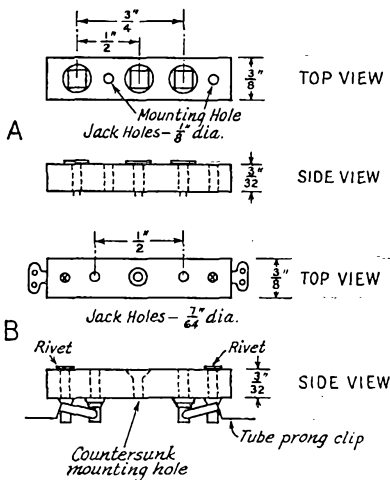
Two crystal holder sockets fabricated by WILLIG. In A, clips from a Millen crystal socket are spaced for both amateur standard and FT243 holders. Another style, for FT243 holders only, is shown in B and utilizes clips from a tube socket riveted in place.
